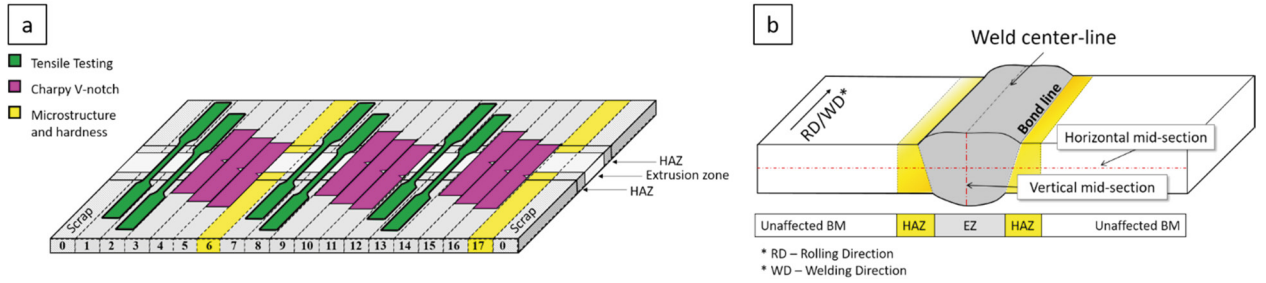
(a) Schematic illustration of sample location relative to the weld center-line. Also the number of specimens tested is indicated; (b) Schematic illustration of different weld zones in the HYB butt joint. BM: base material, BL: Bond line, HAZ: Heat affected zone, EZ: extrusion zone.
